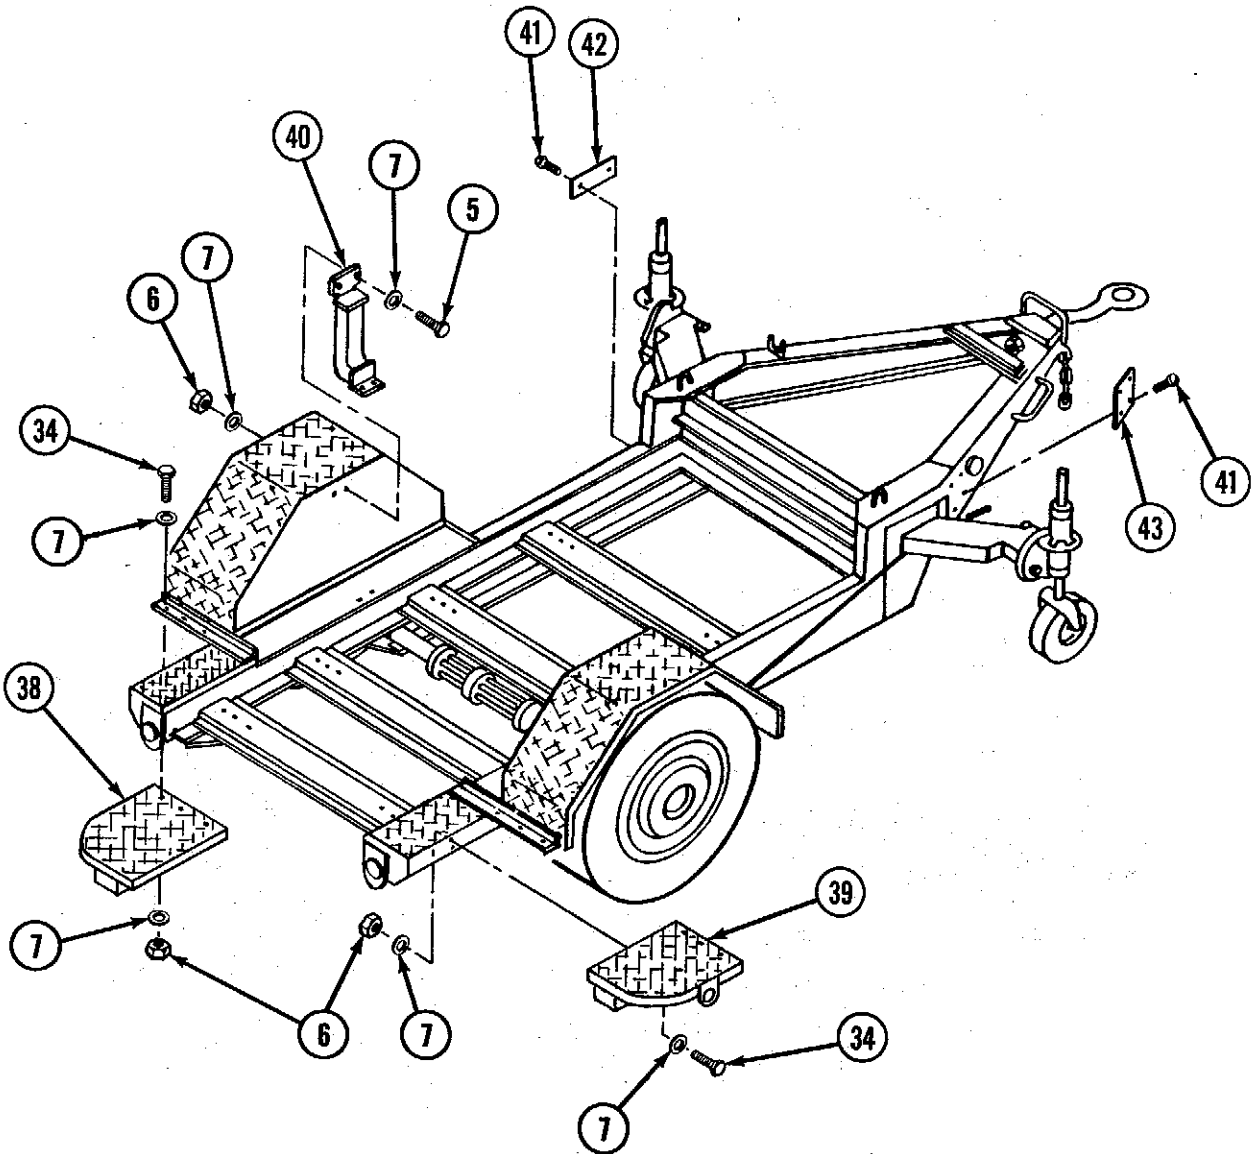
Trailer Assembly (Sheet 3 of 3)
